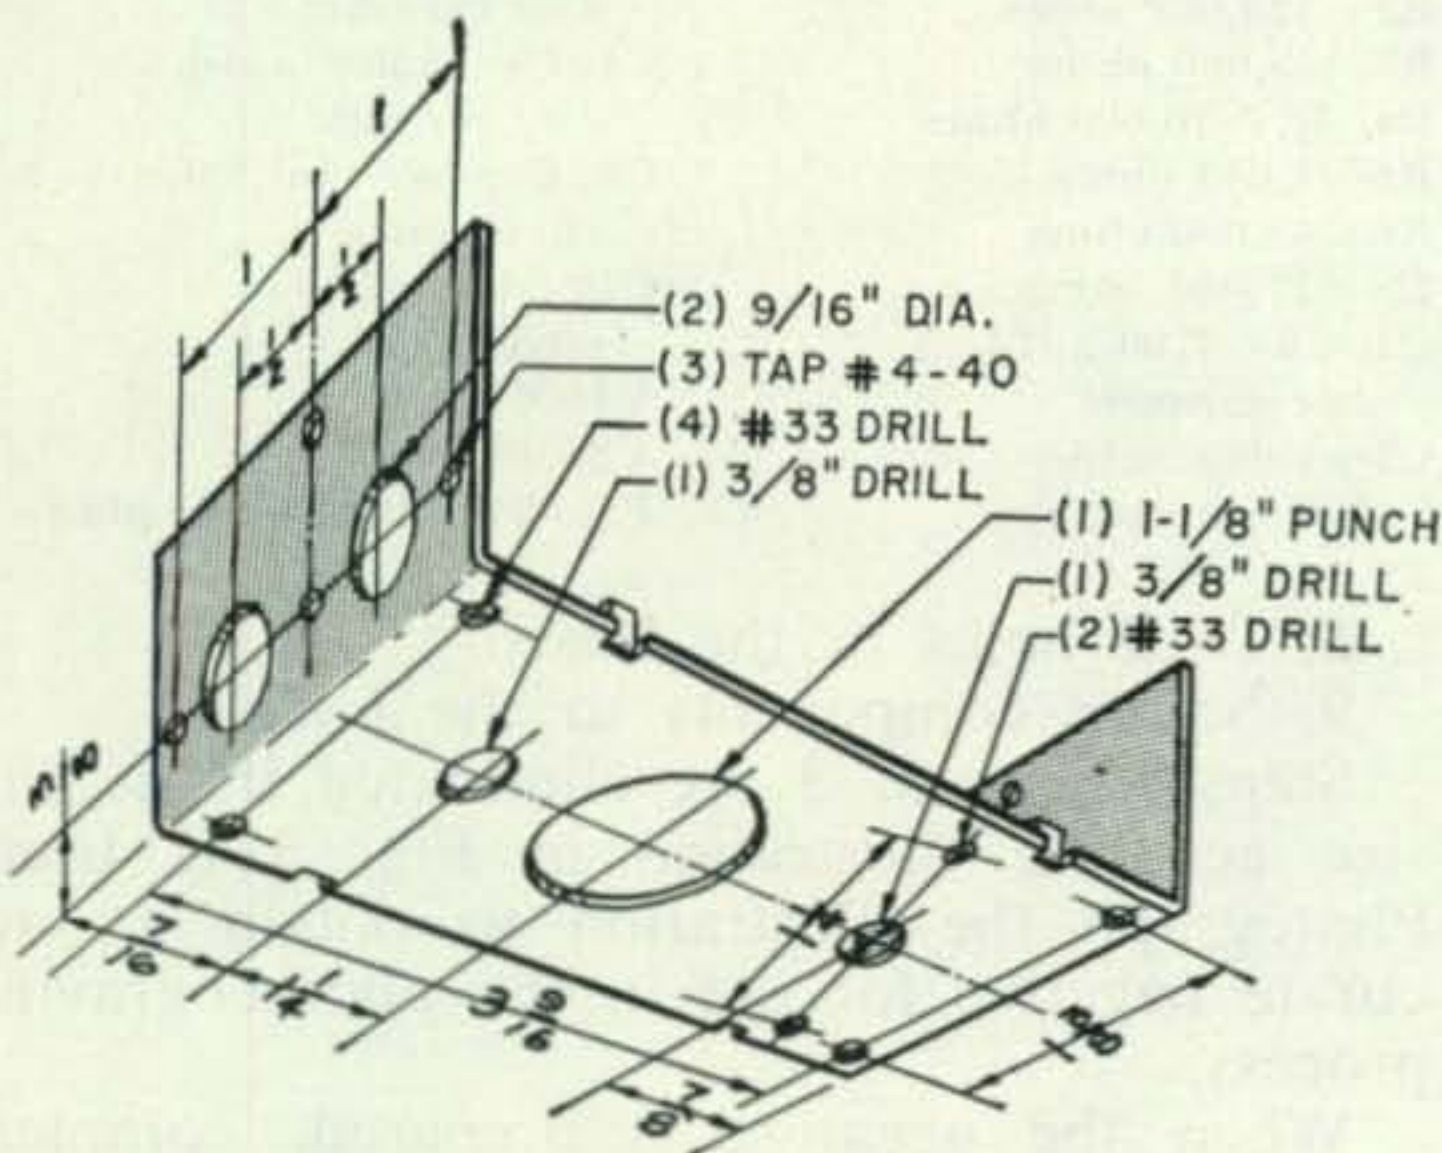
View of the "Channel Lock" box showing location of holes and listing drill holes.
